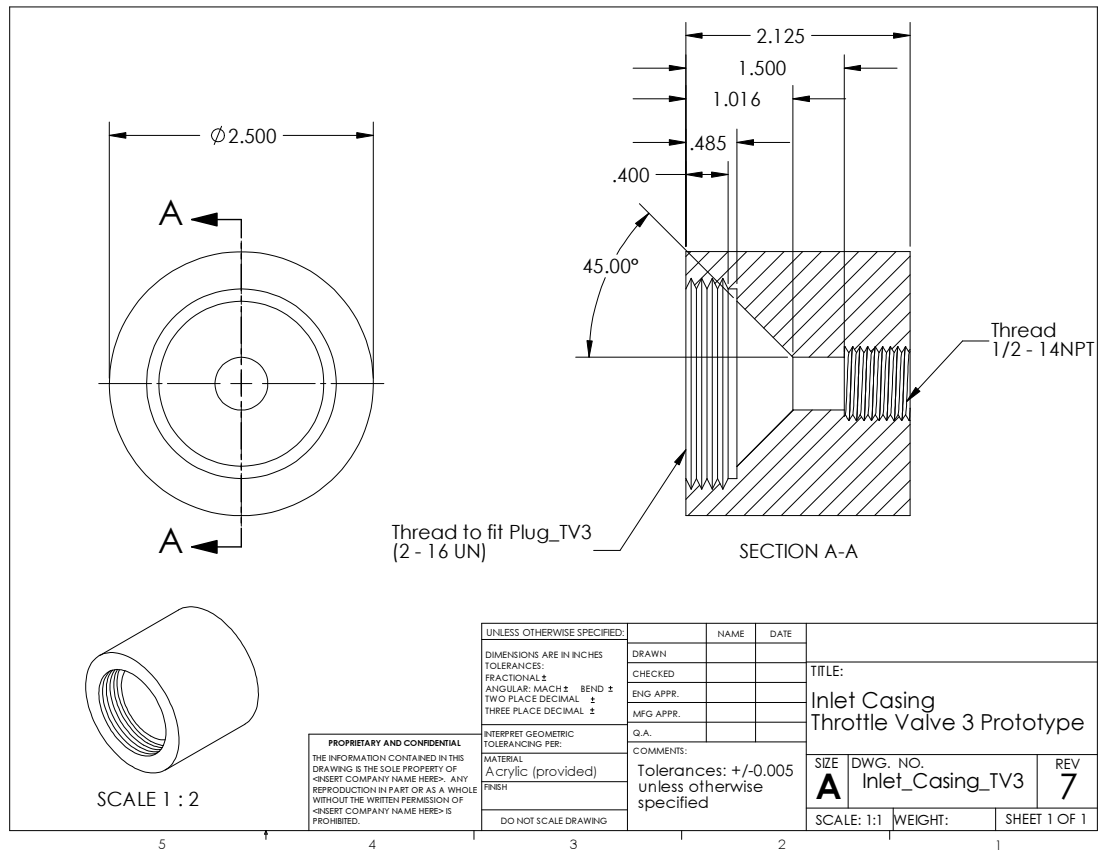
Inlet casing component drawing for split-flow plug valve prototype (TV3).
